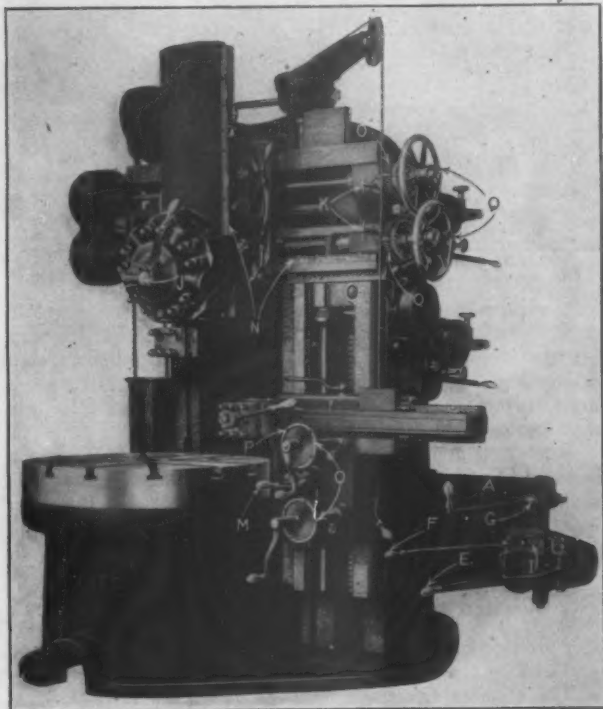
The Maxi-Mill Type of 42-In. Vertical Turret Lathe Built by the Bullard Machine Tool Company, Bridgeport, Conn.
